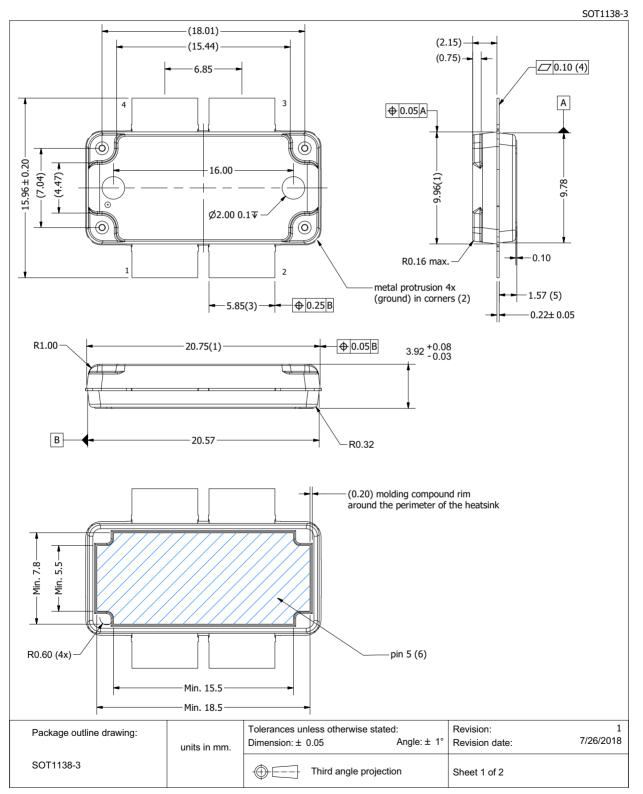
Package outline SOT1138-3 (sheet 1 of 2)
